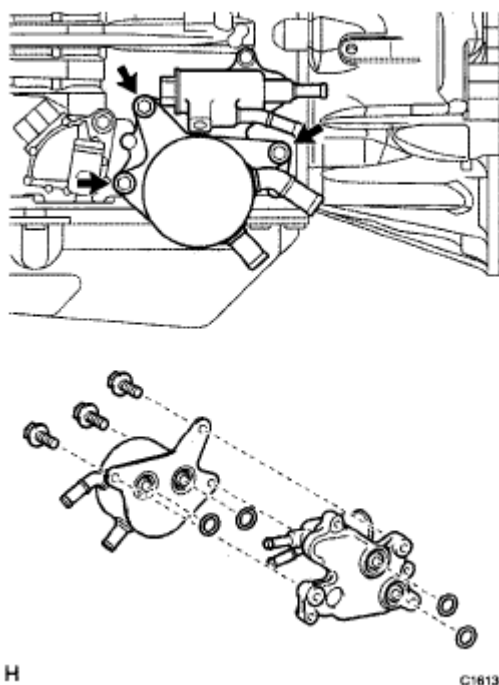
Identifying Transmission Oil Cooler Bolts (W/ Trailer Towing System)
